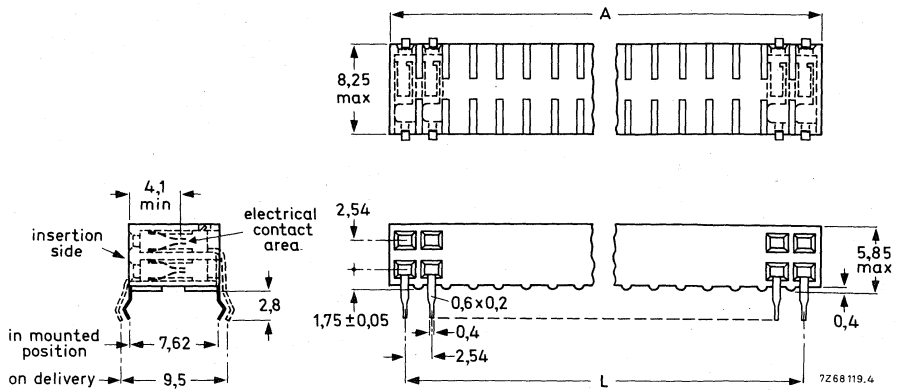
Board edge socket, double row. See Table 1 for dimensions A and L.
